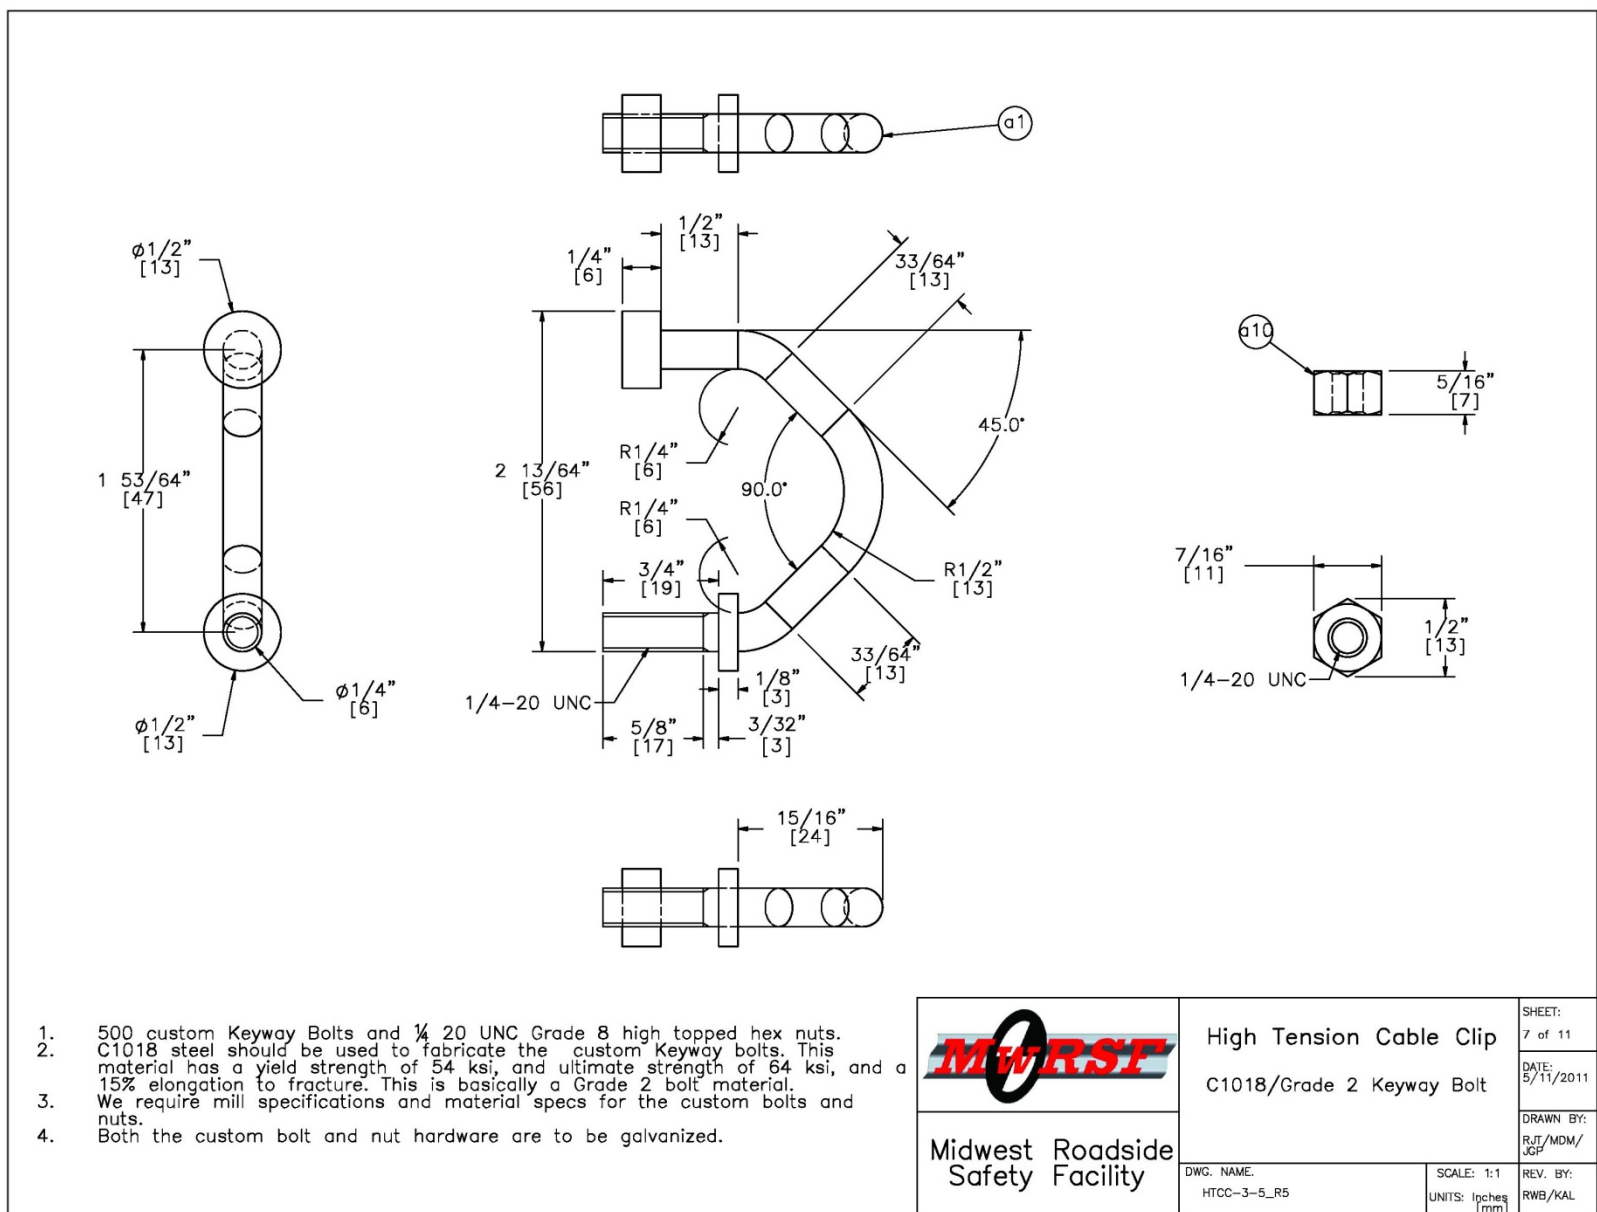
Keyway Bolt Detail, Post Assembly A, Test No. HTCC-3
